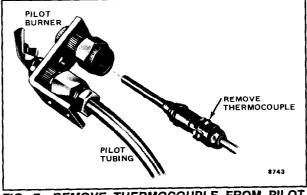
REMOVE THERMOCOUPLE FROM PILOT BURNER.
